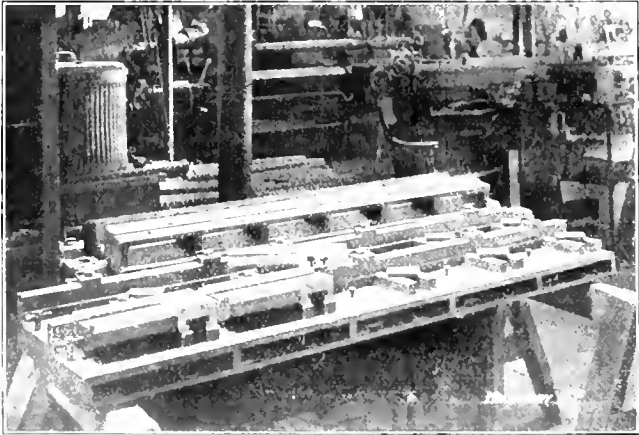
Fixture for Holding Lathe Carriage Shdes while planing them
